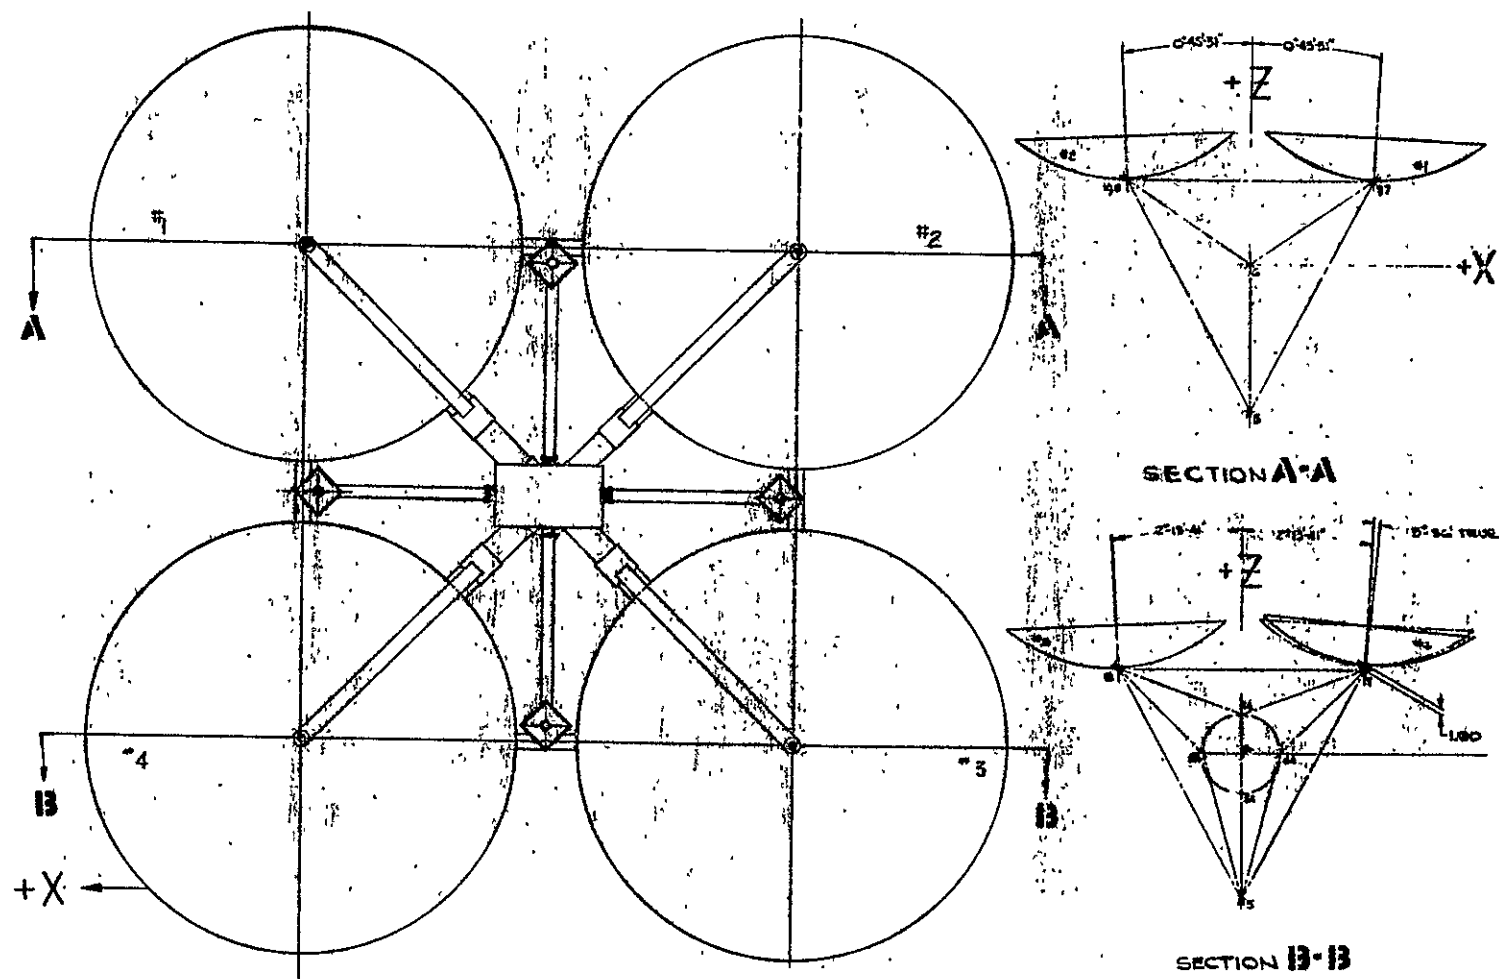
ANTENNA LAYOUT DESIGN INTERFEROMETER AND REFLECTOR ASSEMBLIES (View 4)
